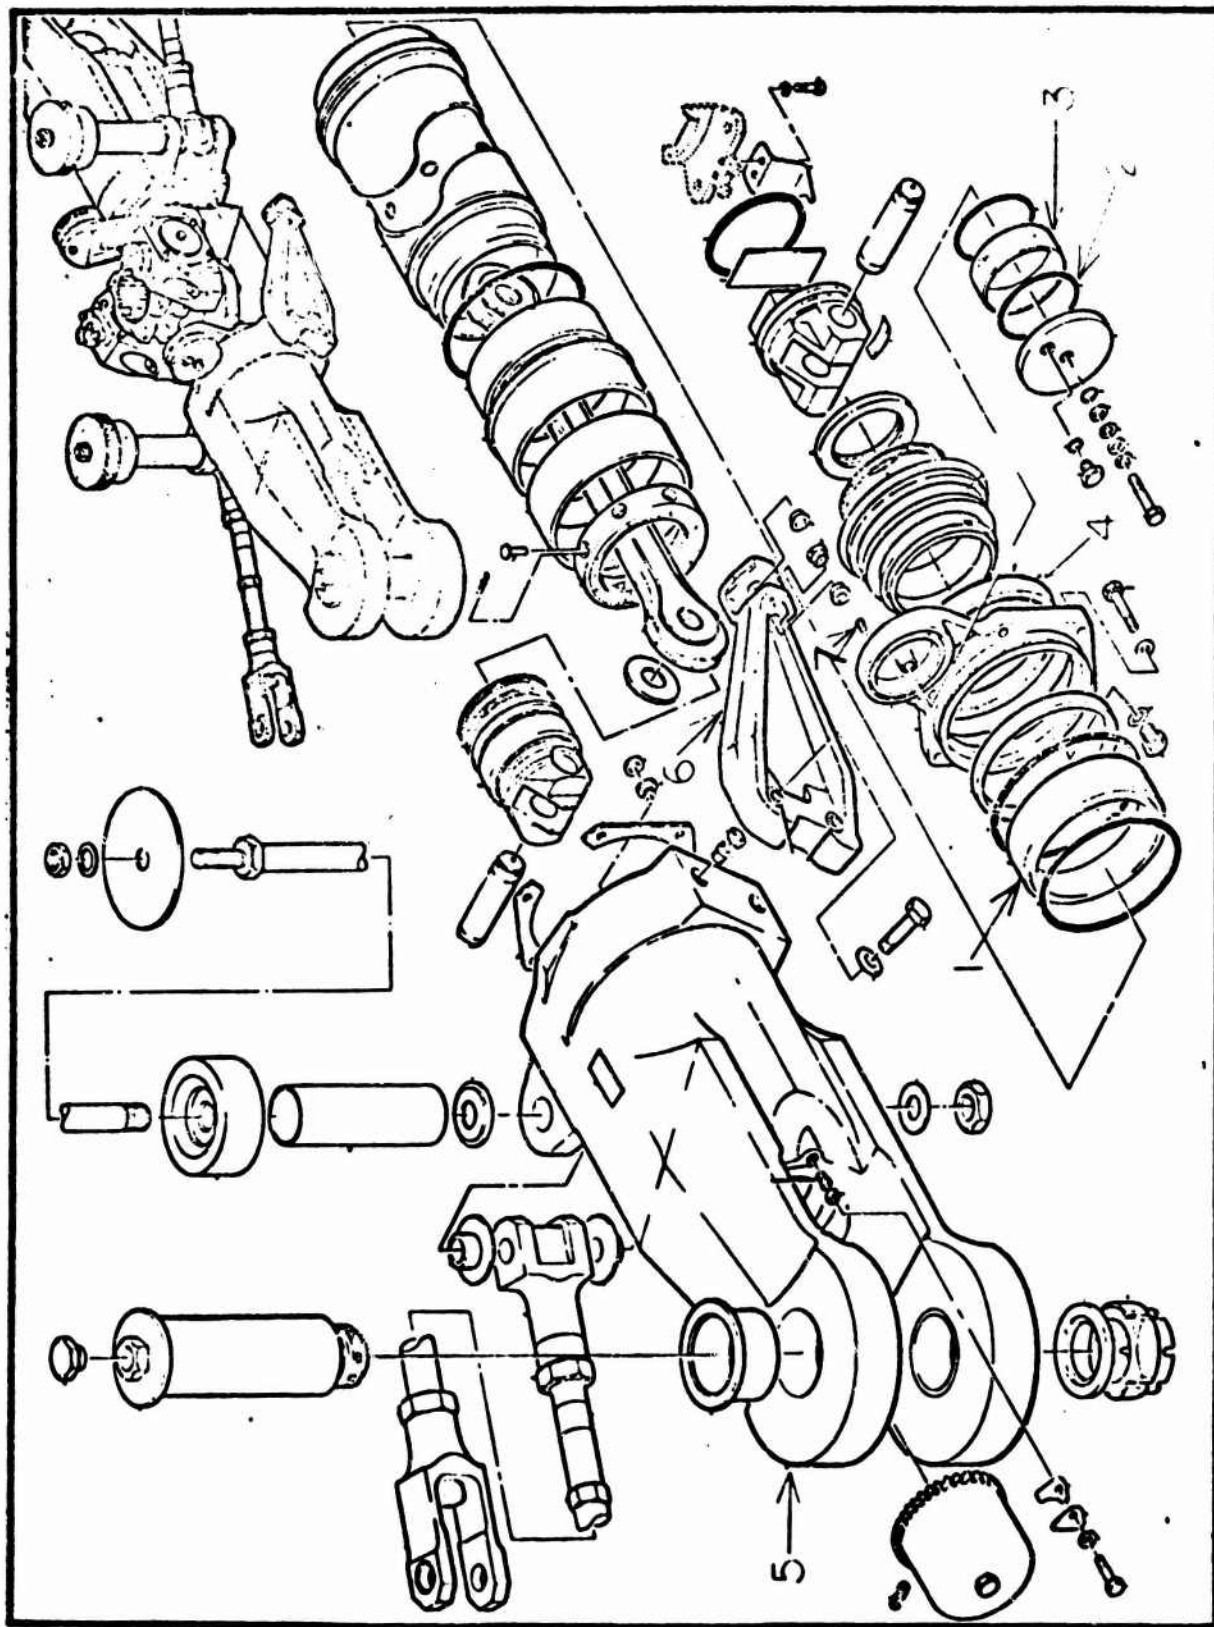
Hub Assembly, Main Rotor, Outboard Section
